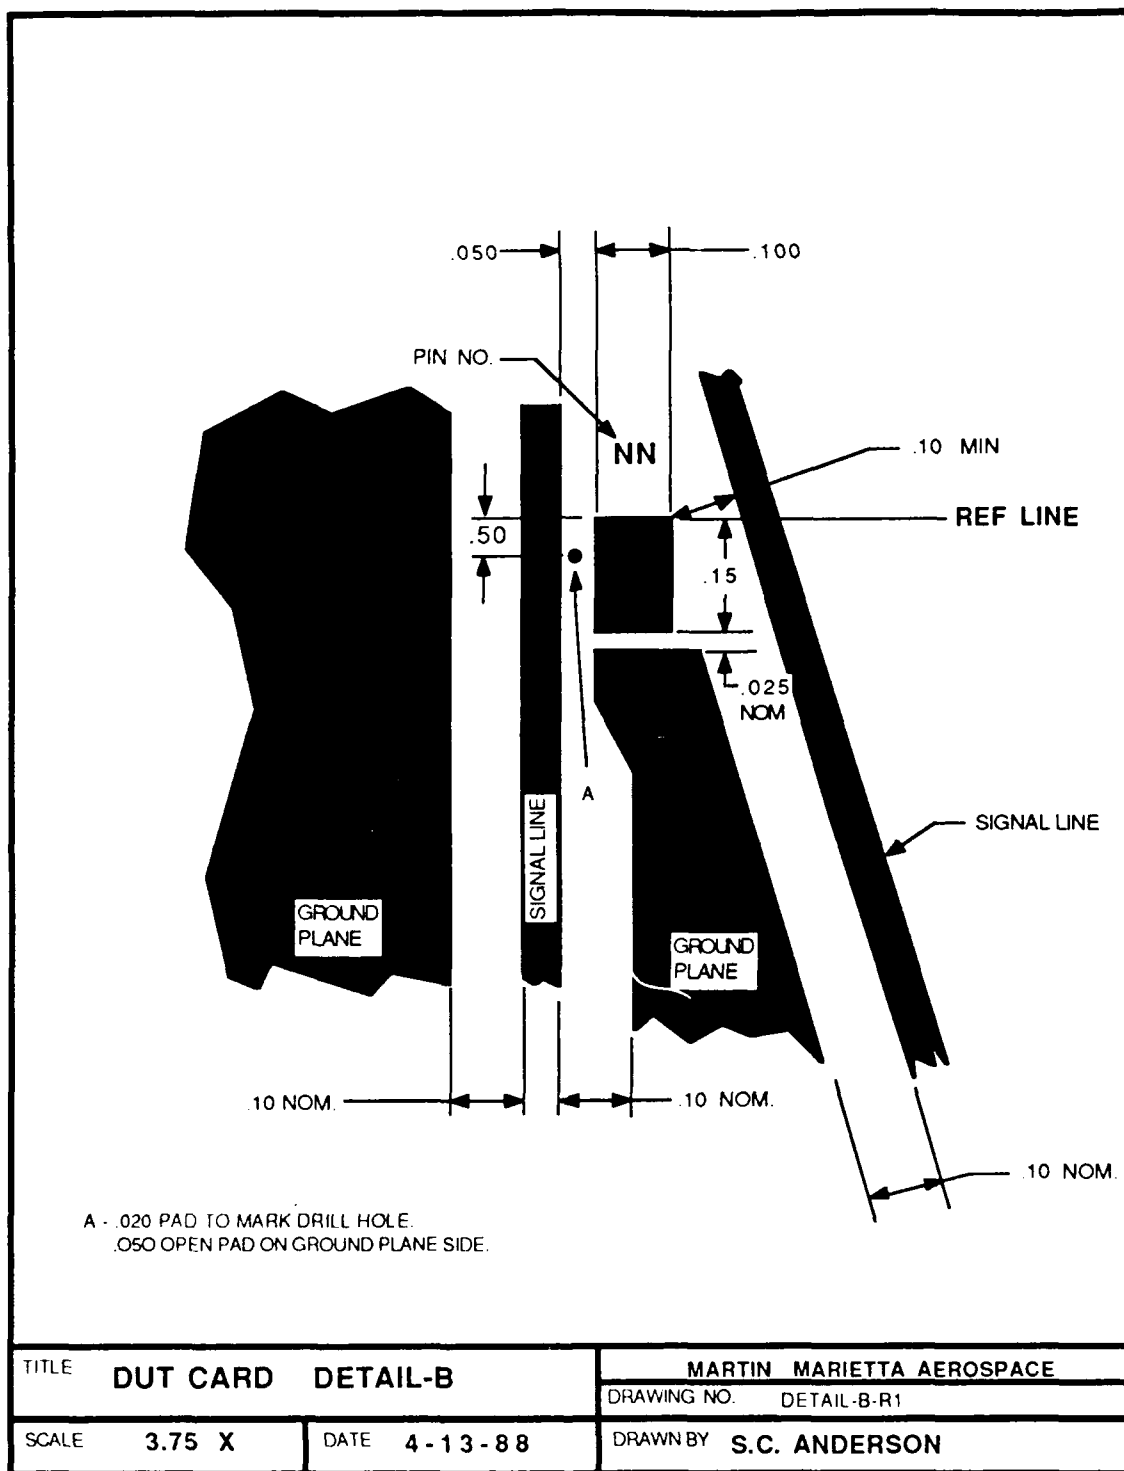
Test Fixture Shop Drawing Showing Detail B (Ref. Figure 7.1.3 and 7.1.4)
